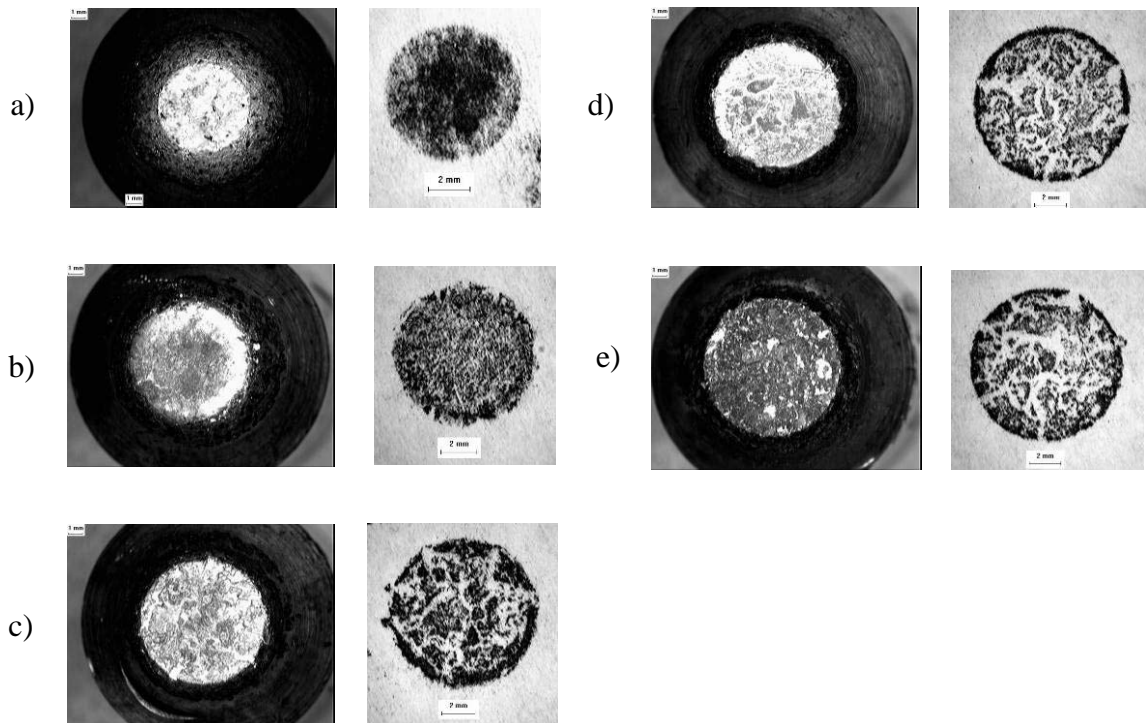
Upper Electrode images and tip imprints from production testing results taken at various weld number intervals: a) 0 welds, b) 500 welds, c) 1000 welds, d) 3000 welds, e) 5000 welds.
